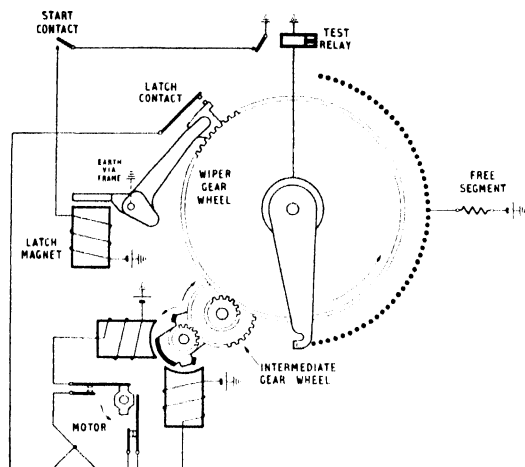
MECHANICAL ARRANGEMENTS OF MOTOR UNISELECTOR
